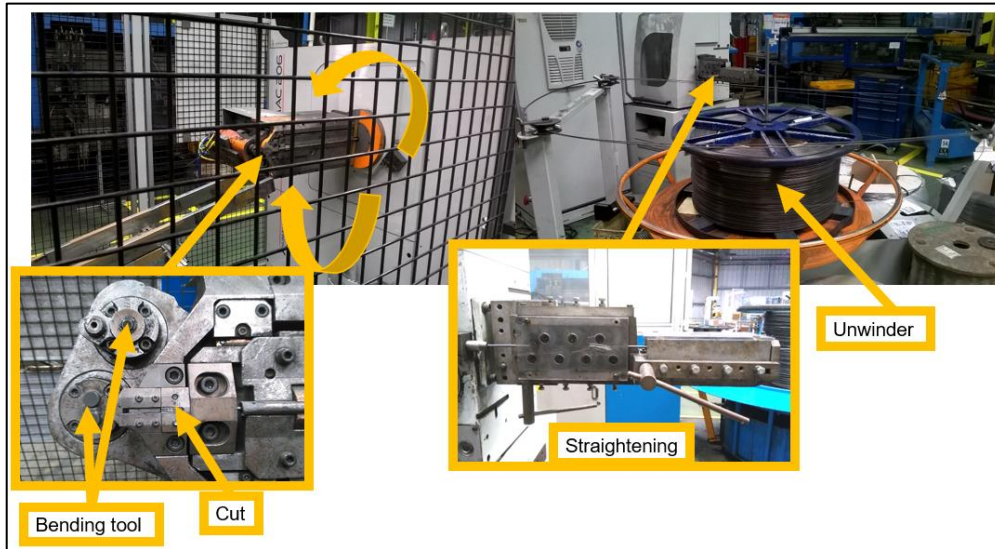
Wire straightening, bending and cutting process on a CNC bending machine
